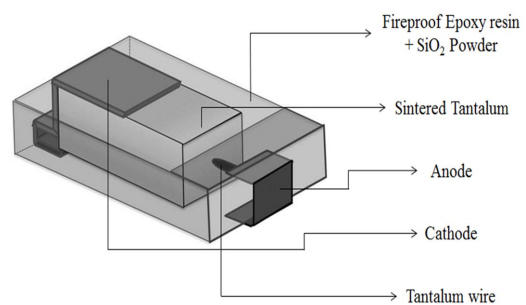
Schematic illustration of SMD (Surface mounted device) type Tantalum capacitor.
